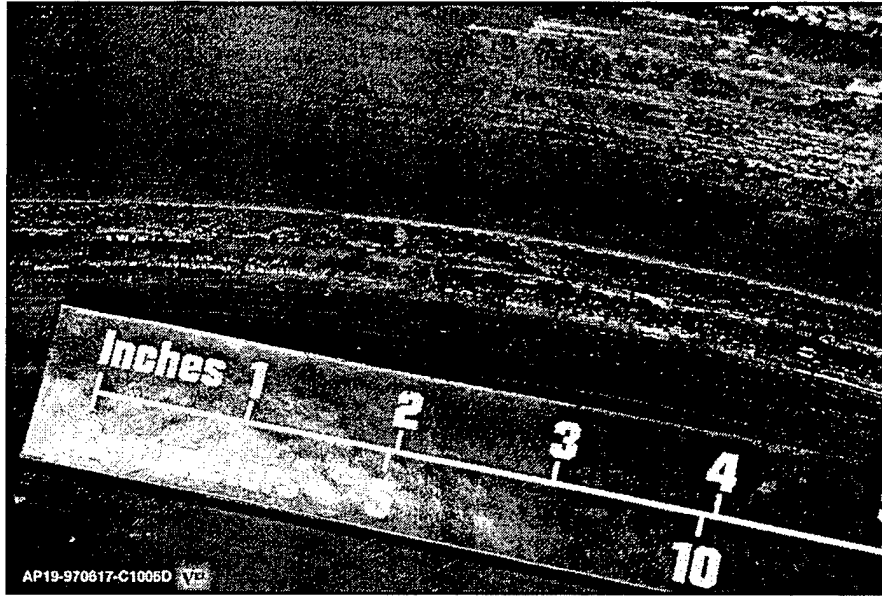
Closeup of Debris Weldment of Ring to Housing
